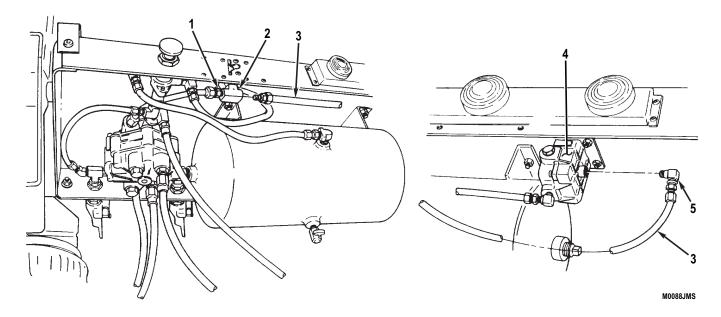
Relay Valve-to-Parking Brake Valve Tube Assembly Replacement.
